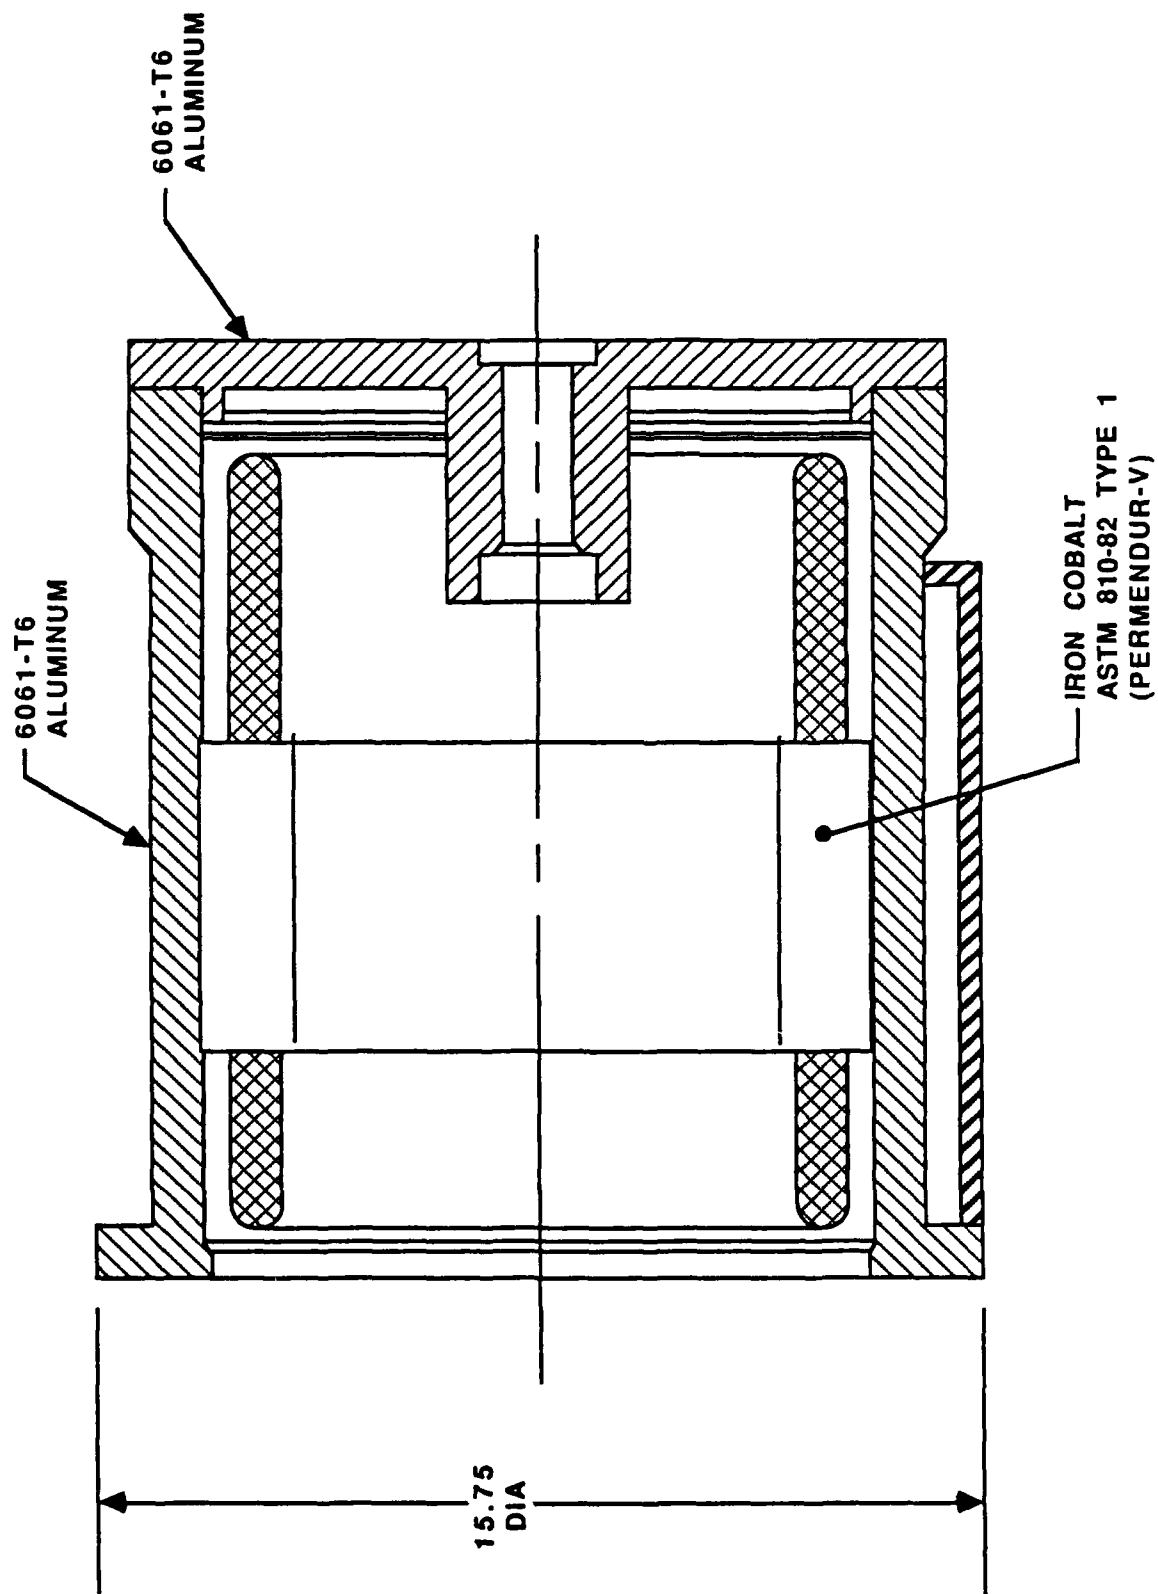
Motor Housing, Stator Assembly and Forward Bulkhead Assembly
